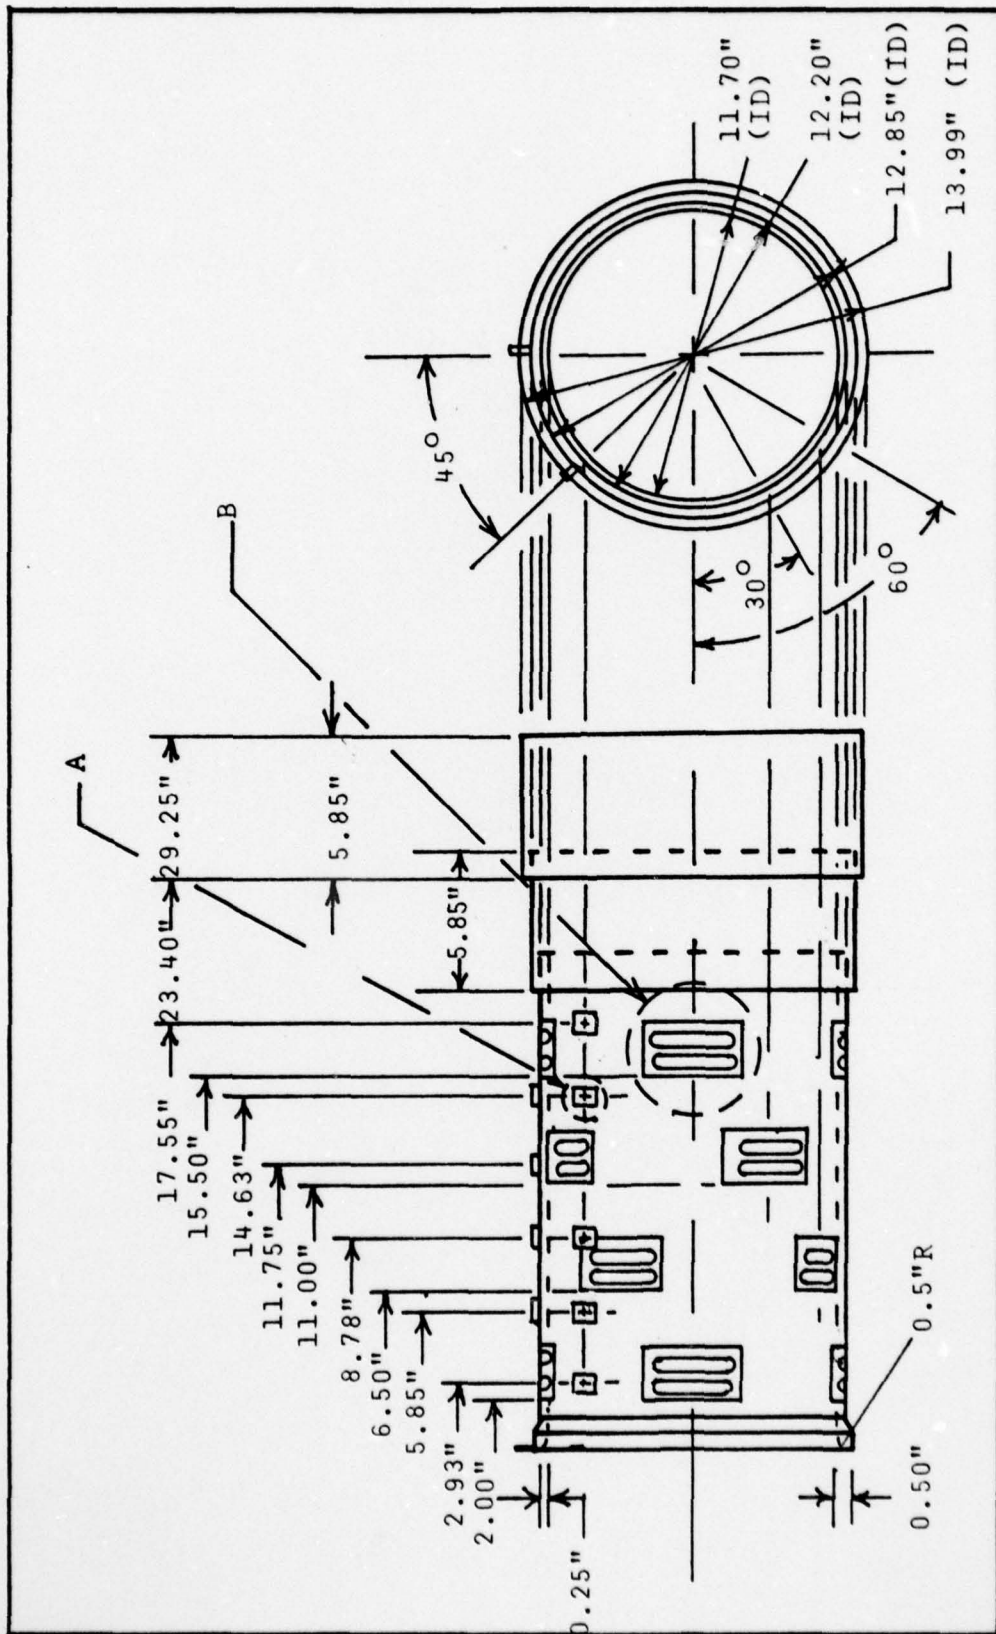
DIMENSIONAL ILLUSTRATION OF PORTED MIXING STACK AND A TWO-RING DIFFUSER
